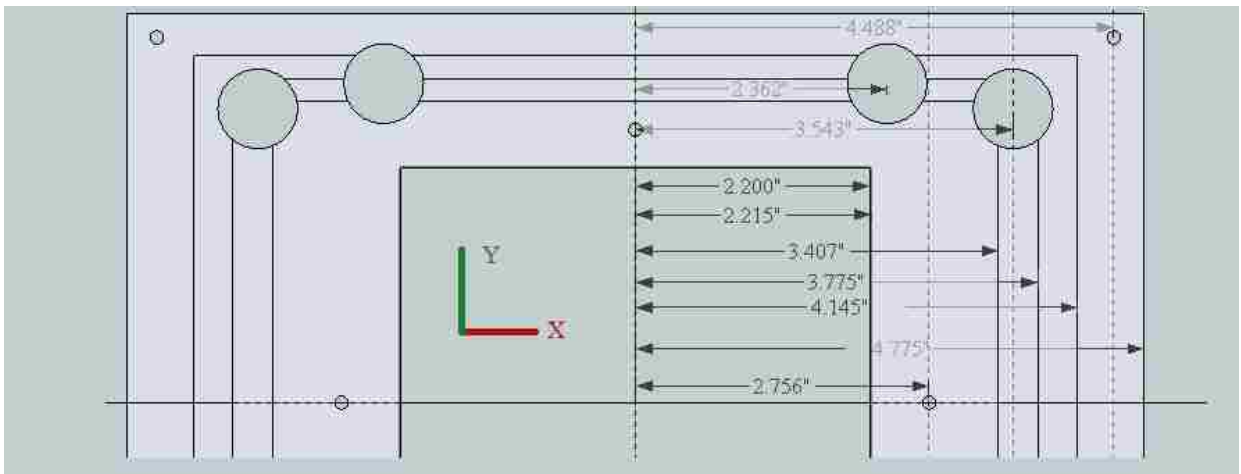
Top view of the 10x10 cm² upper trimmer lead plate illustrating the cross-plane dimensions.
